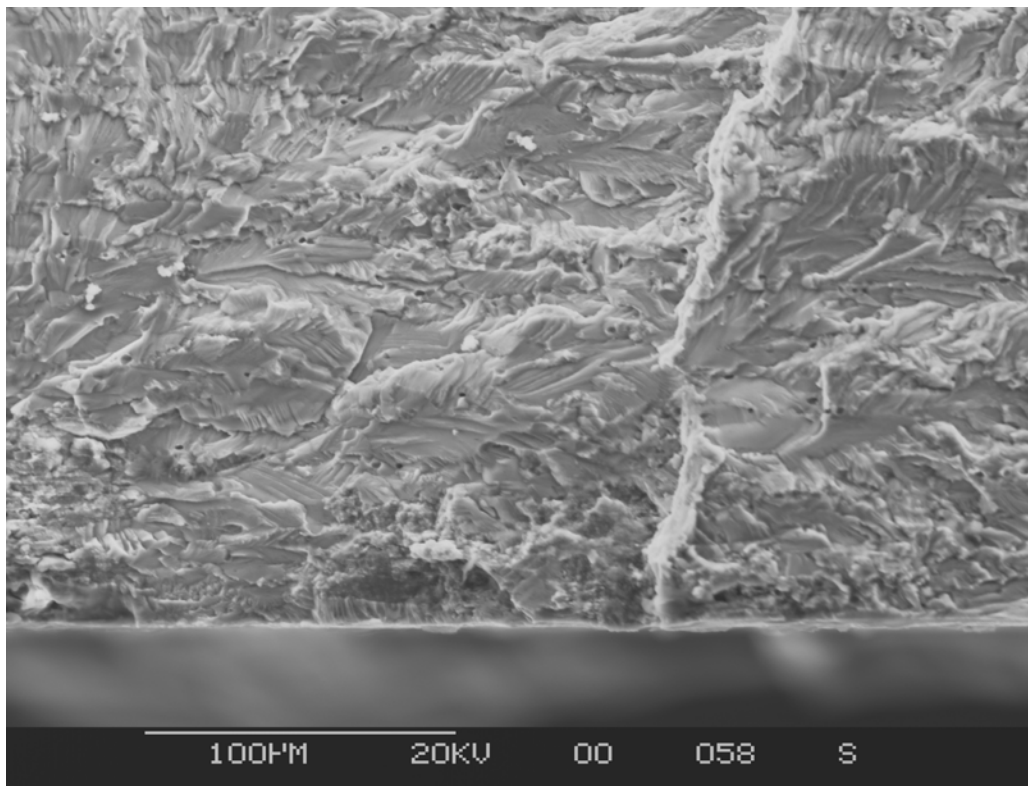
Pits Adjacent to Crack Origin (B in Fig. B-98) on Specimen 5969.
